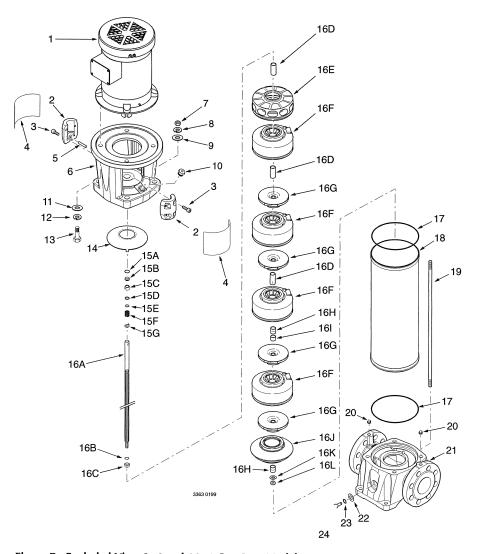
Exploded View 2m3 and 4m3 Cast Iron Models
